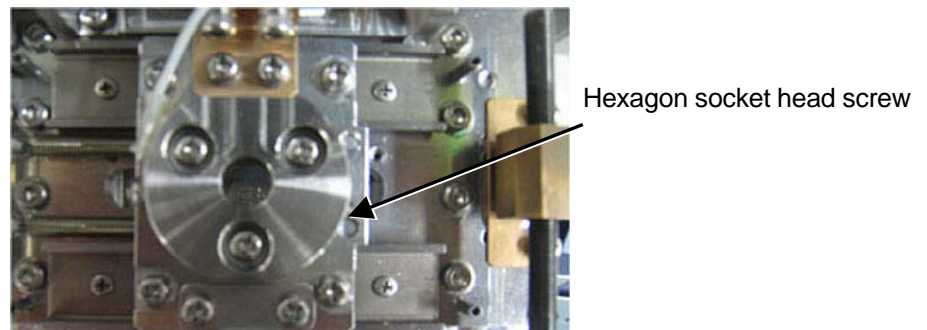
Hexagon Socket Head Screw That Fixes Lock Nut 2
